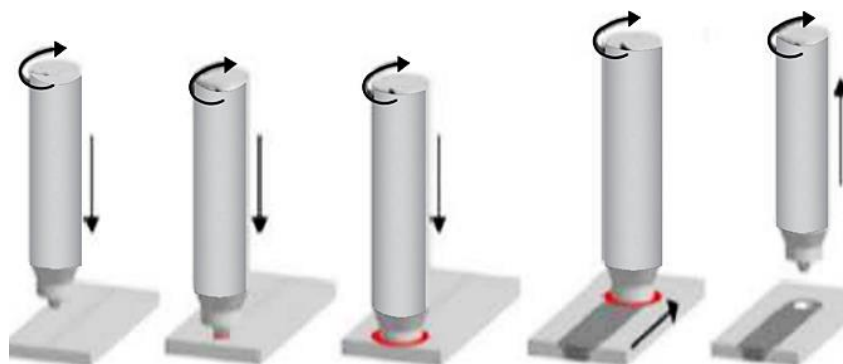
Schematic of the friction stir welding steps [51]
